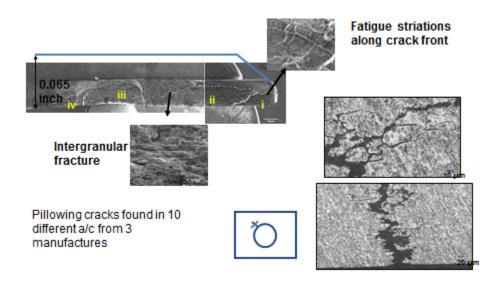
Lap joint skin with a crack surface showing both intergranular and fatigue zones.
